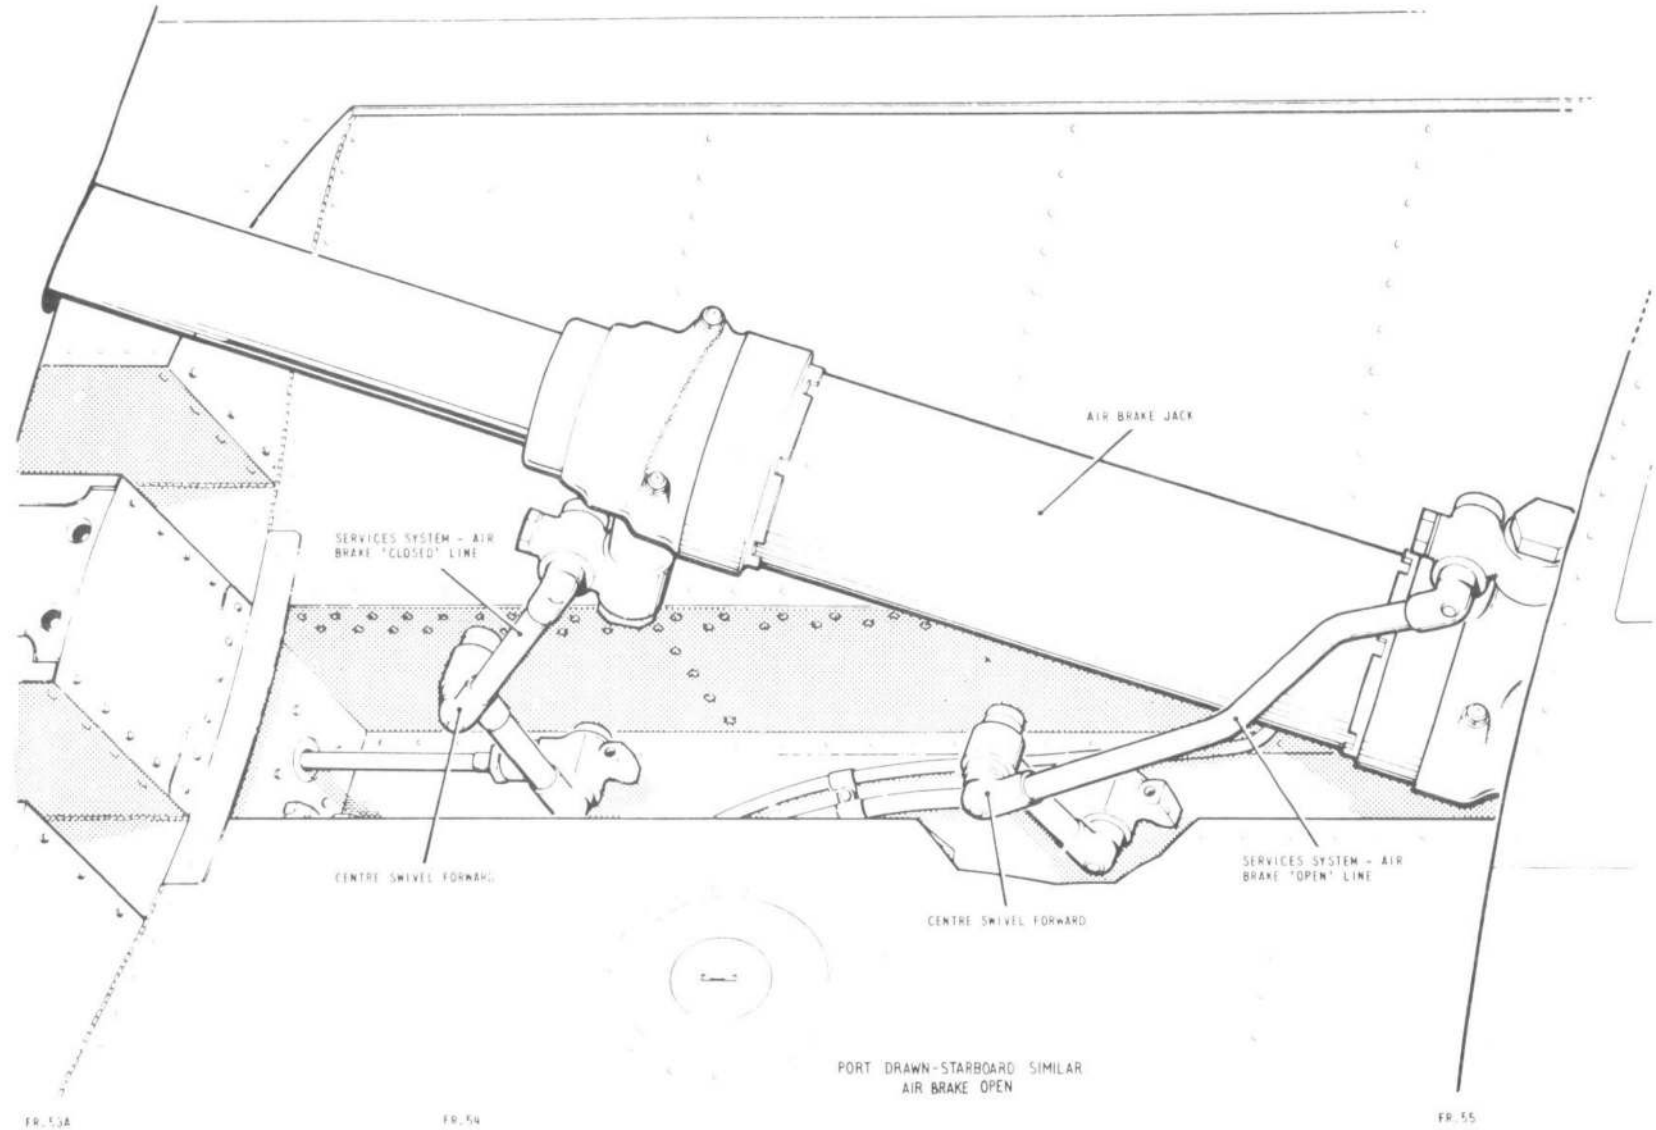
AIR BRAKE JACK SWIVEL COUPLINGS
